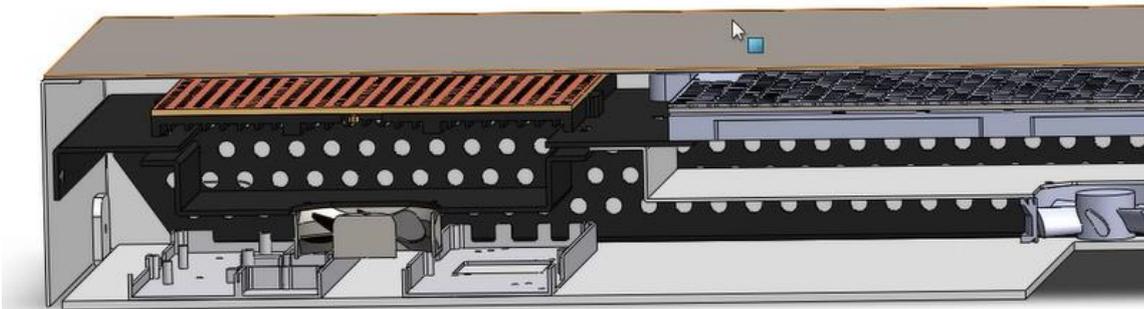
BACK PART TERMINAL DEMONSTRATOR
